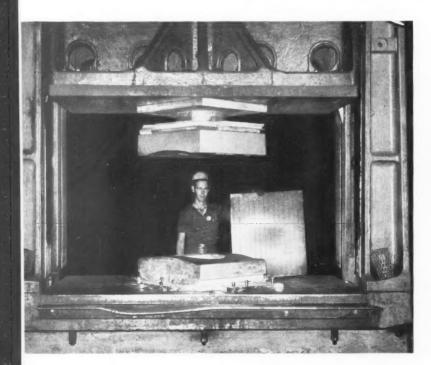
Cecostamp equipped with epoxy-faced die members for producing the aluminum-alloy part illustrated in Figs. 5 and 6
